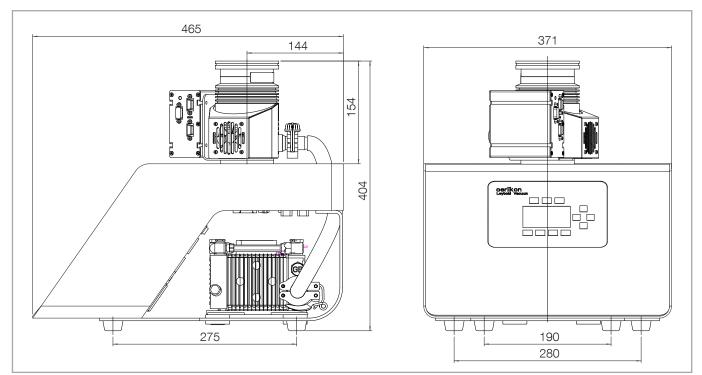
Dimensional drawing TURBOLAB 80, dimensions in mm
